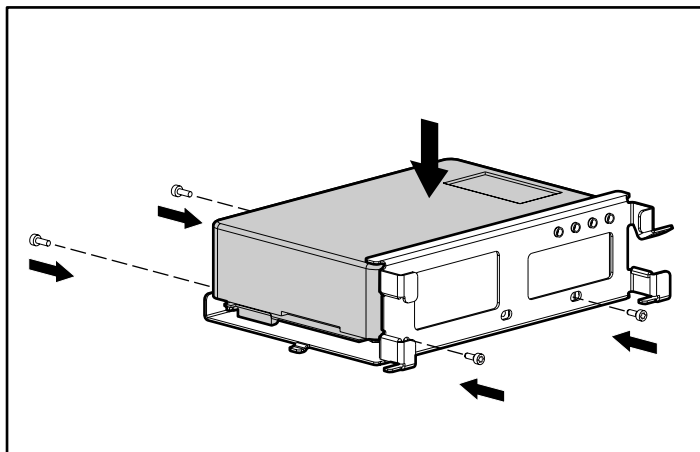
Installing the 9.1-GB hard drive in the hard drive bracket
